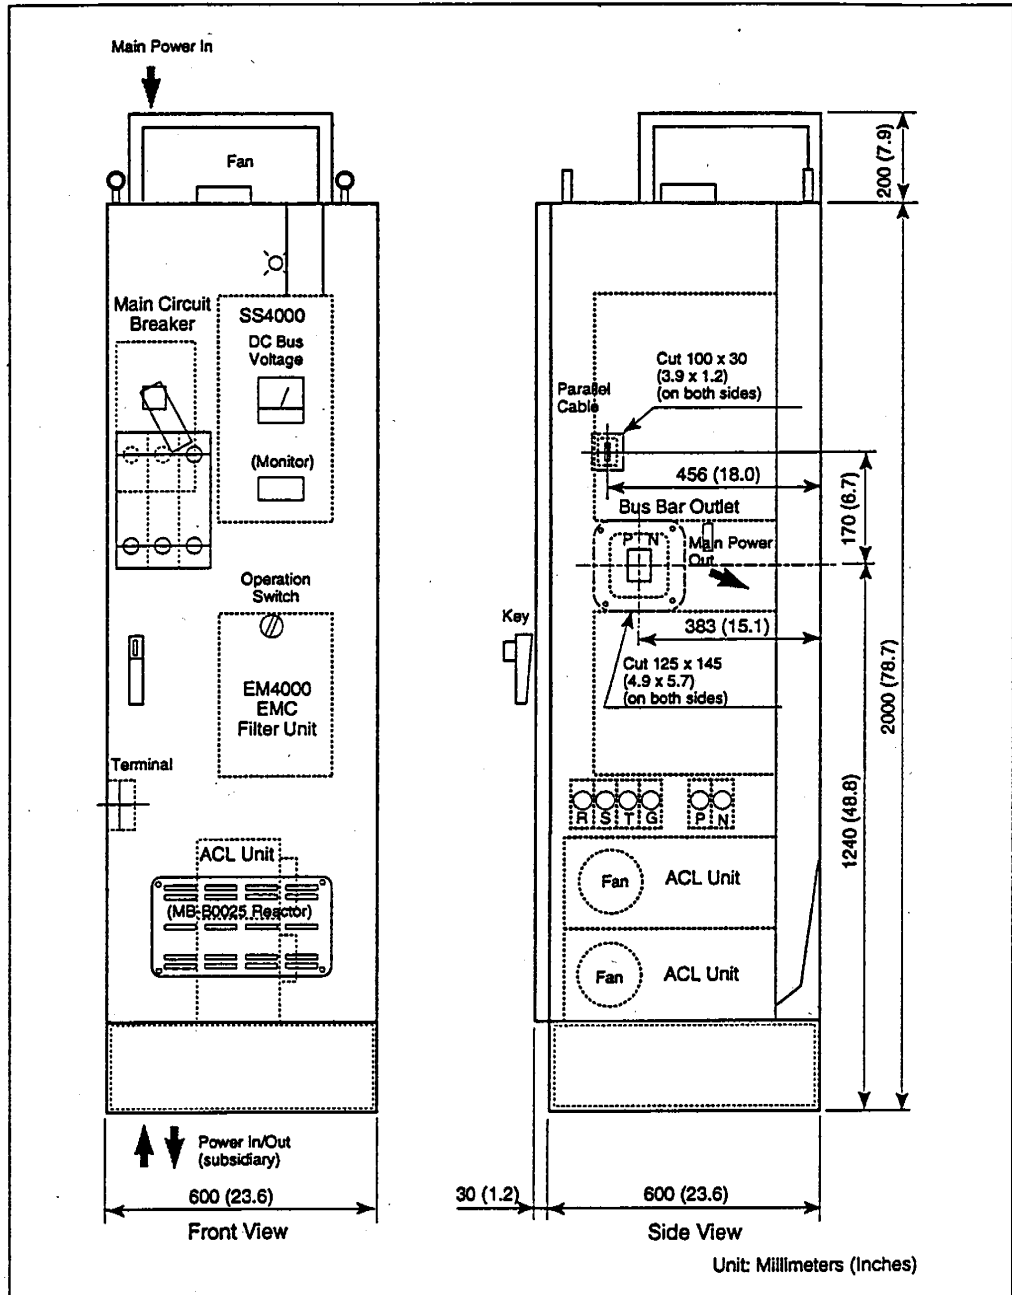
Dimensional Outline Drawing of Model S241B and S2265 Cabinets
